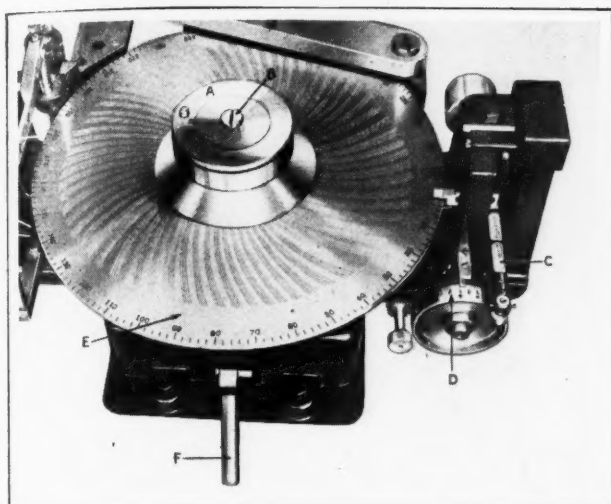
Close-up View of Work Adapter and Cradle Dial
